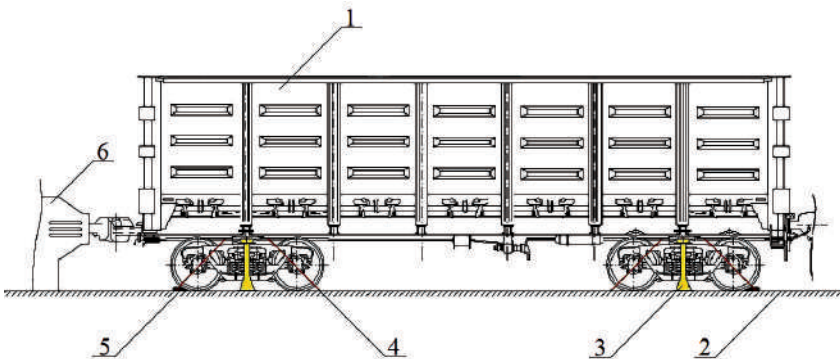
Diagram of fastening a car on the ferry deck:
